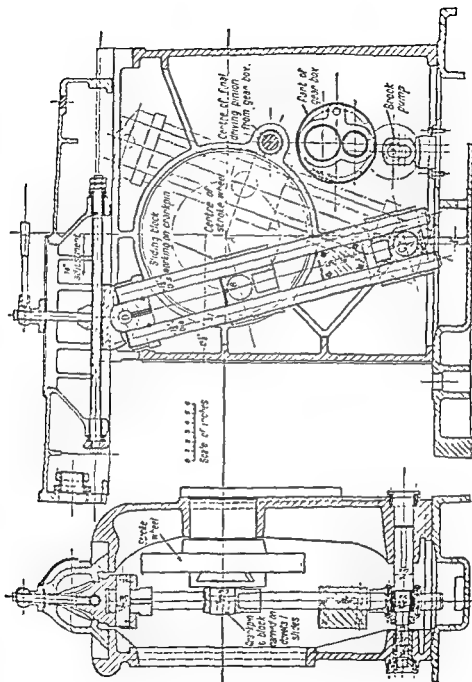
Link Motion Assembly of 18-inch Crank Shaper.
